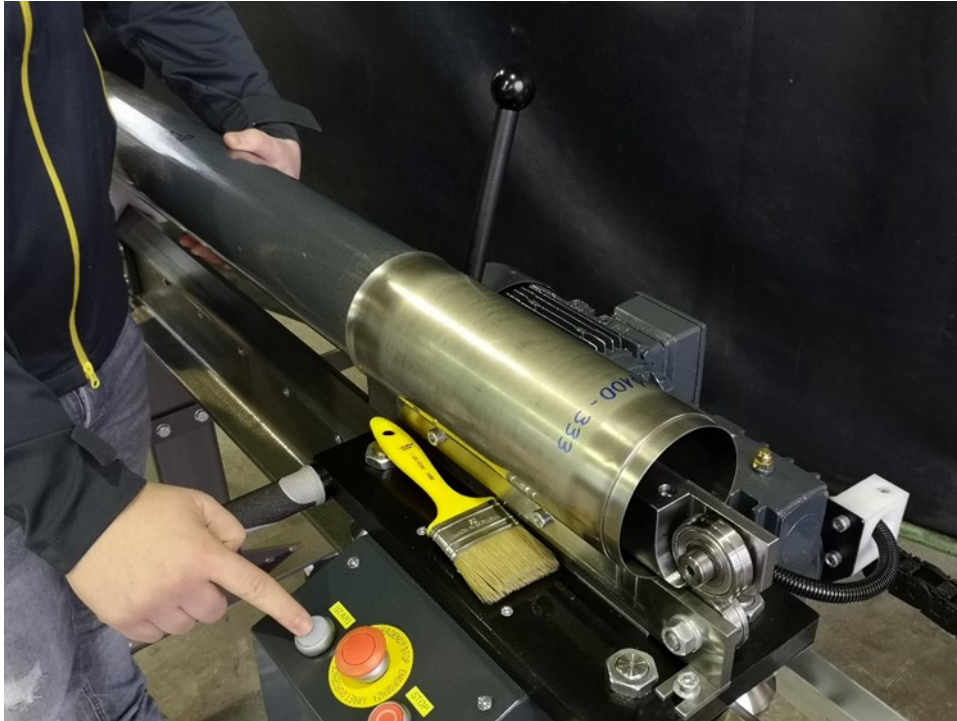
Press the button to engage the drive sprocket. Note that the lever is positioned vertically, meaning the drive sprocket is engaged with the rack.
